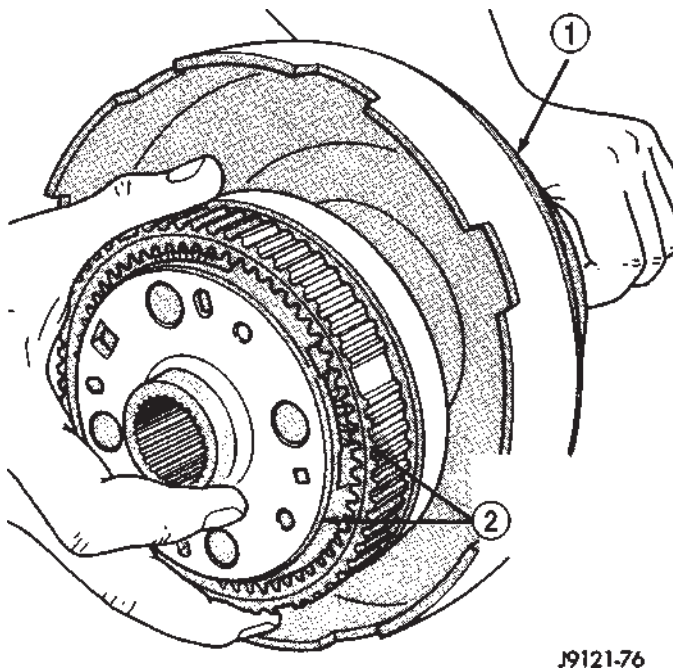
Installing Front Planetary And Annulus Gear Assembly
